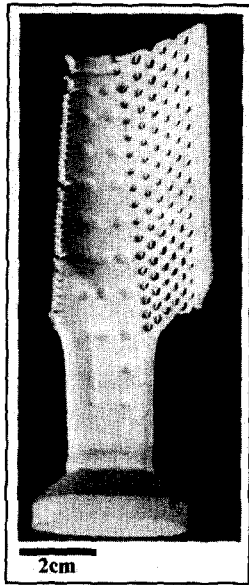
The fused silica-based ceramic core fabricated through gelcasting process.
